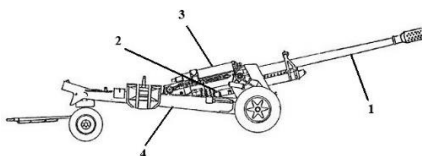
View of the 130 mm M46 gun with assembly positions: 1 – barrel assembly; 2 - upper carriage assembly; 3 - assembly of the anti-roll device; 4 - lower carriage assembly [6]
